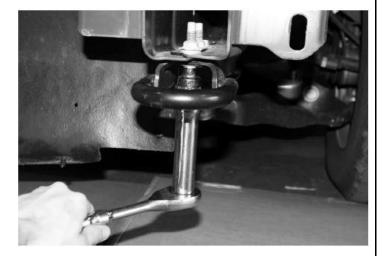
BUMPER MOUNTING BOLTS (VIEW FROM TOP)
